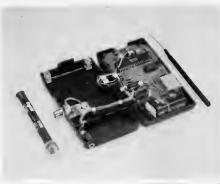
This photograph shows clearly how the meter is assembled in the case.
